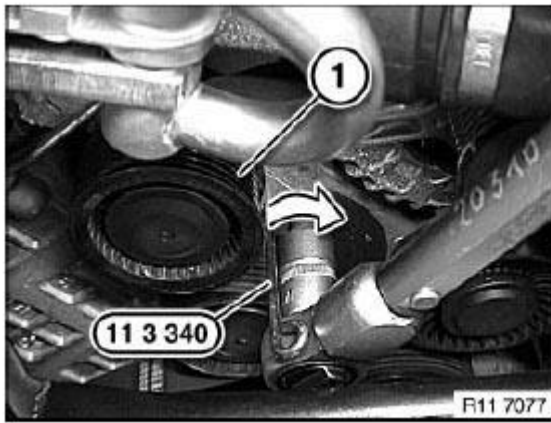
Identifying Belt Tensioner And Special Tool 11 3 340
